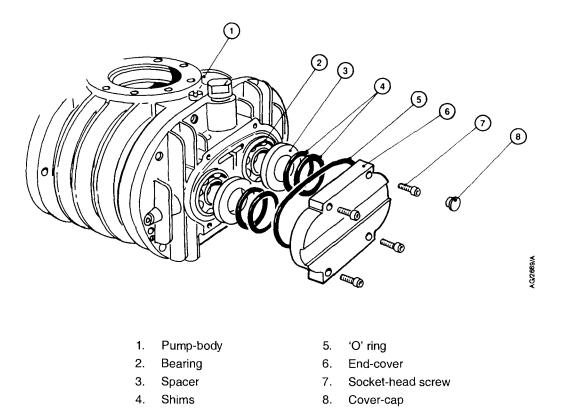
Lubricate the rear bearing (QMB250F and QMB500F only)
